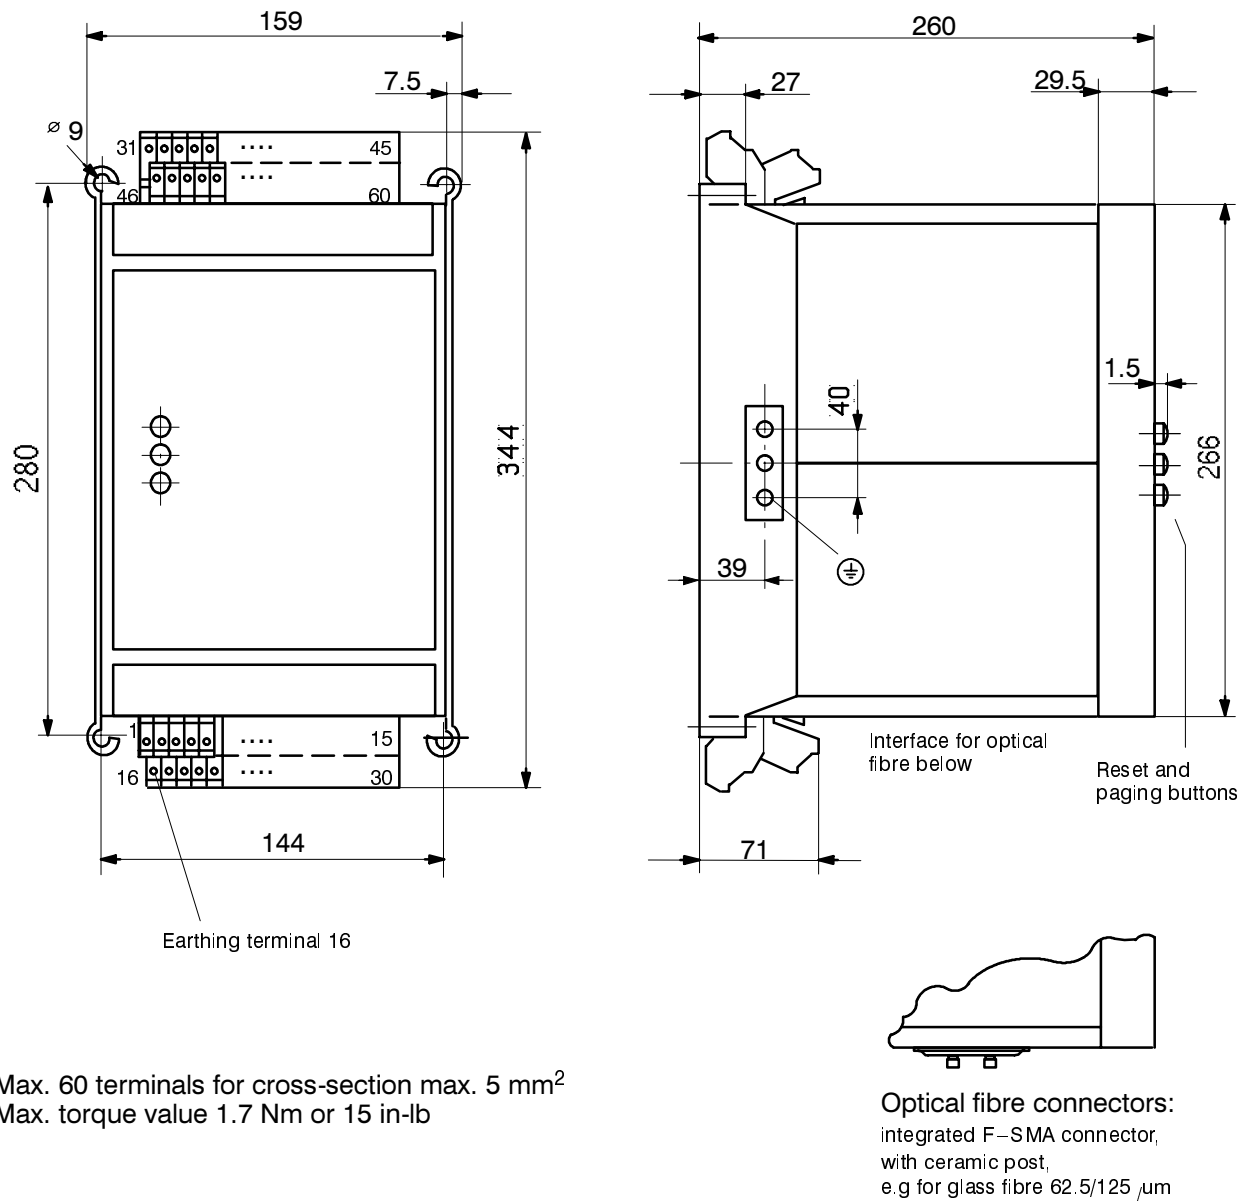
Dimensions for housing 7XP2030–1 for panel surface mounting
